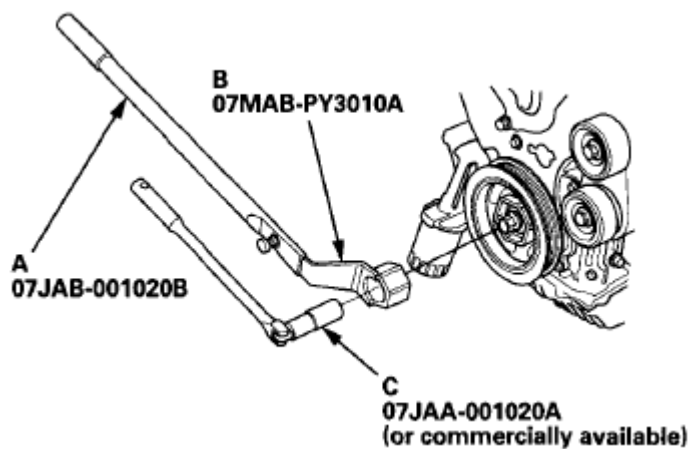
Identifying Holder Handle, Holder Attachment And Offset Of Pulley
